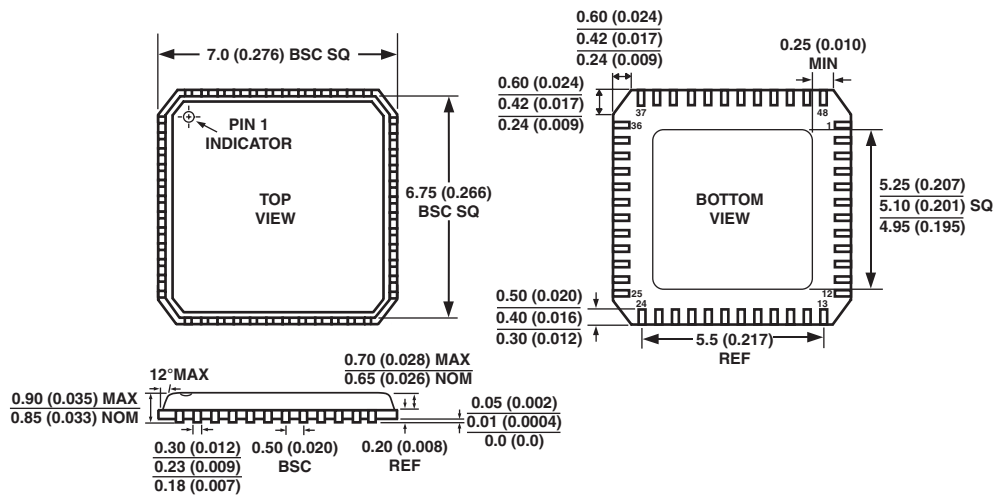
48-Lead Frame Chip Scale Package [LFCSP] (CP-48)—Dimensions shown in millimeters
